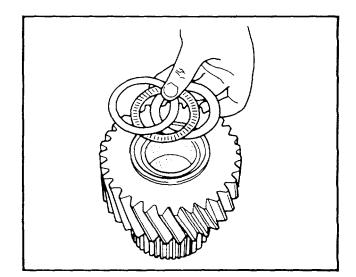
Front thrust needle bearing and thrust races removed.
